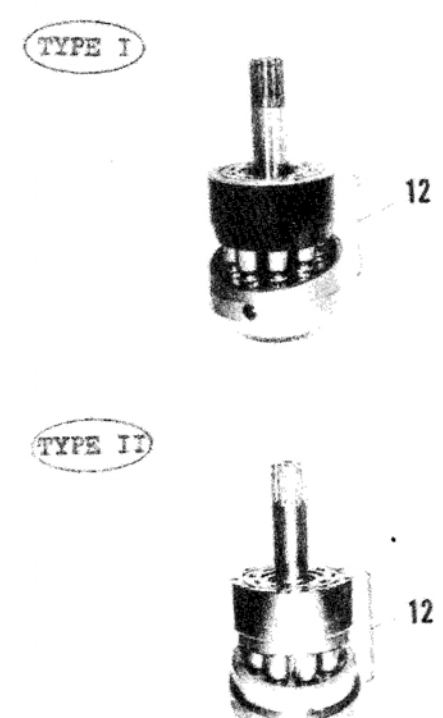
View showing Type I and Type II motor cylinder block assembly (12).
